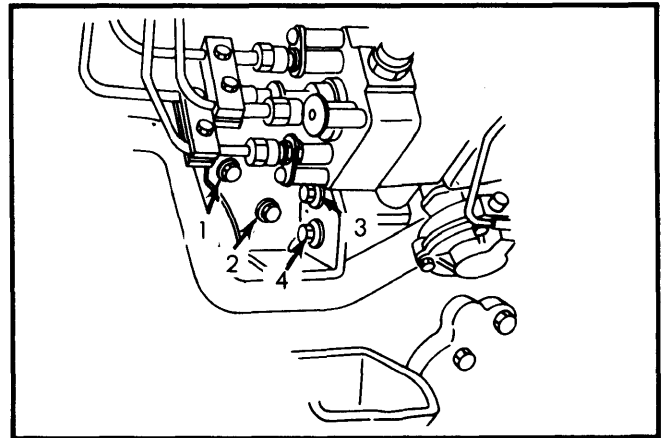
I-Mark Injection Pump Rear Bracket Bolt Tightening Sequence
